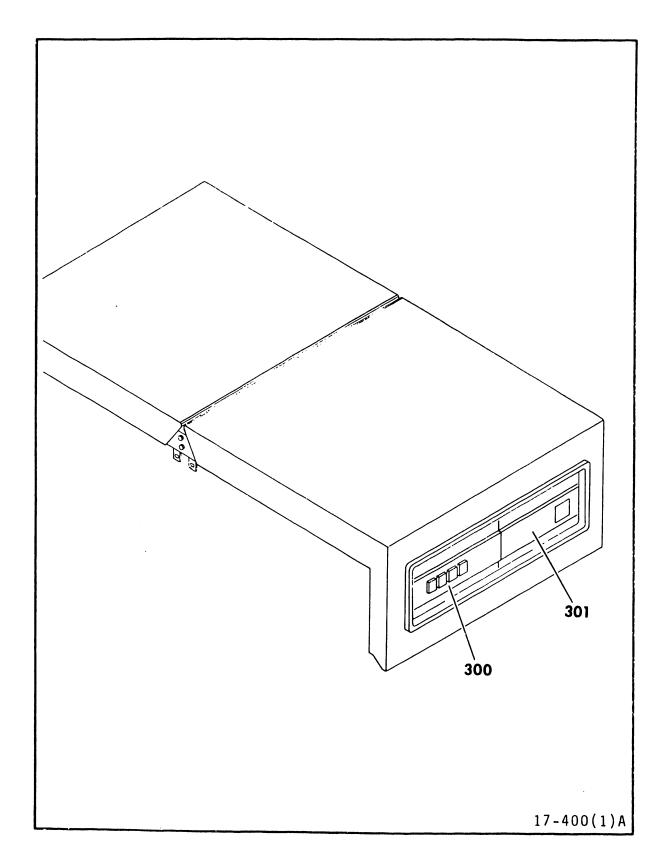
A-4. Top Cover Assembly (Sheet 1 of 4)
